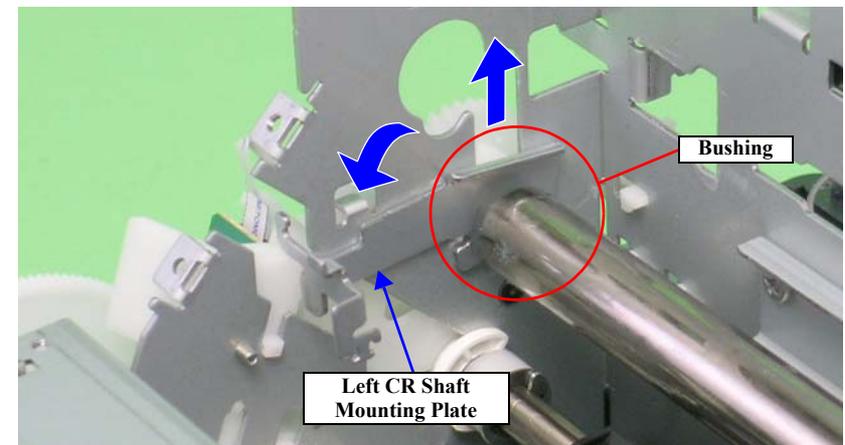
Removing the Left CR Shaft Mounting Plate
